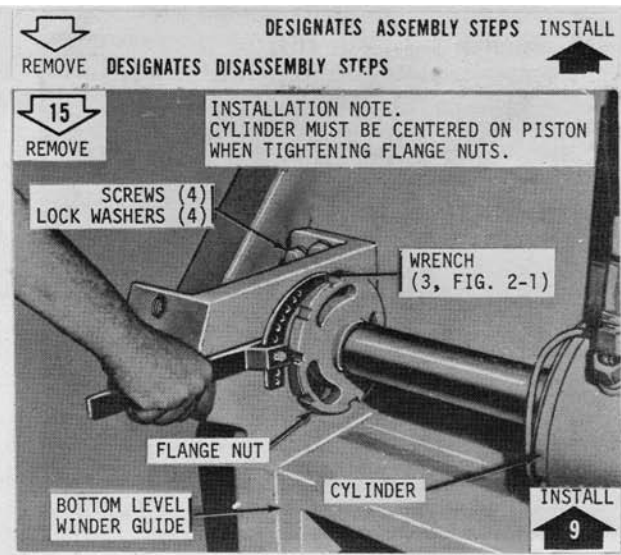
Disassembly of main winch and spade assemblies into subassemblies (Sheet 2 of 4).
